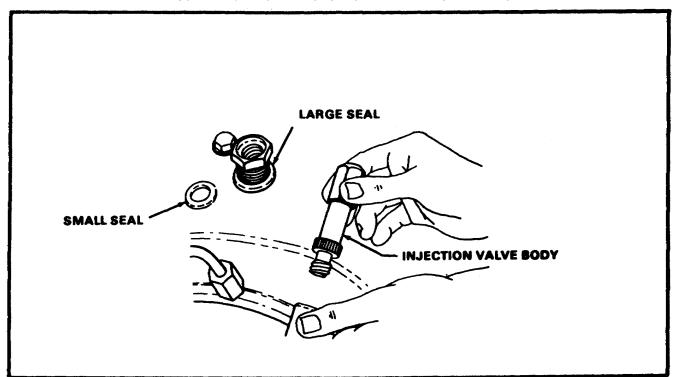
FUEL INJECTION VALVE INSTALLATION
